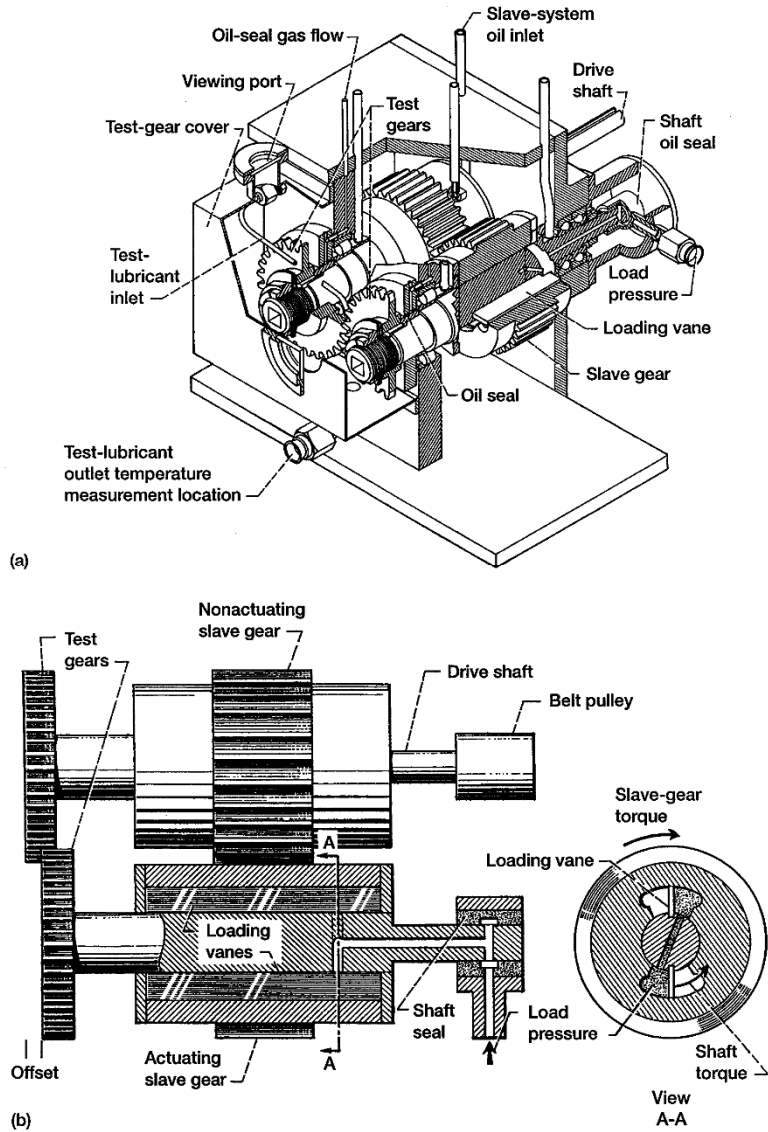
NASA Glenn Research Center gear fatigue test apparatus. (a) Cutaway view. (b) Schematic view.
